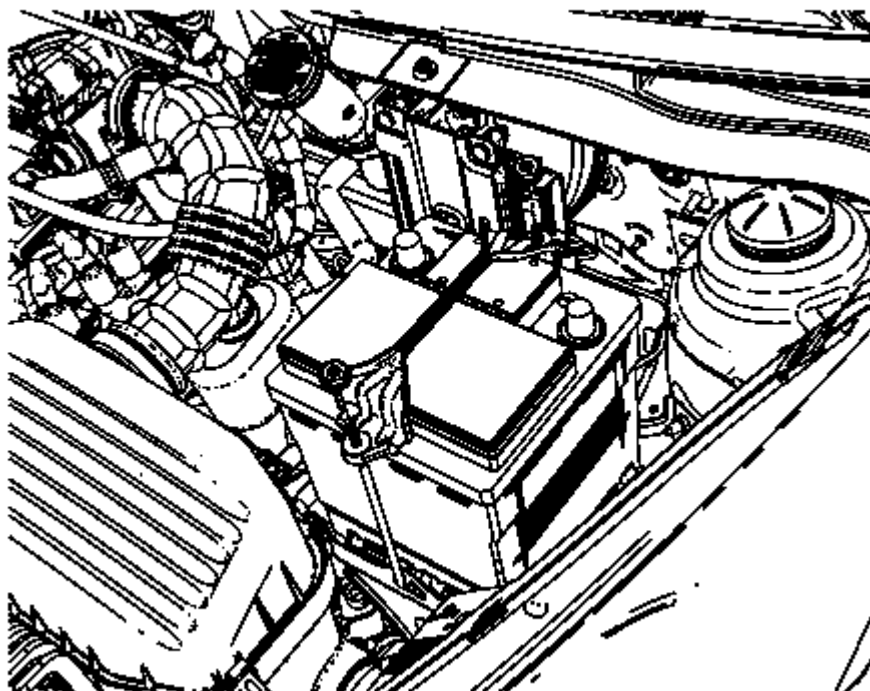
Engine Control Module (Ecm) Bracket Retaining Bolt
